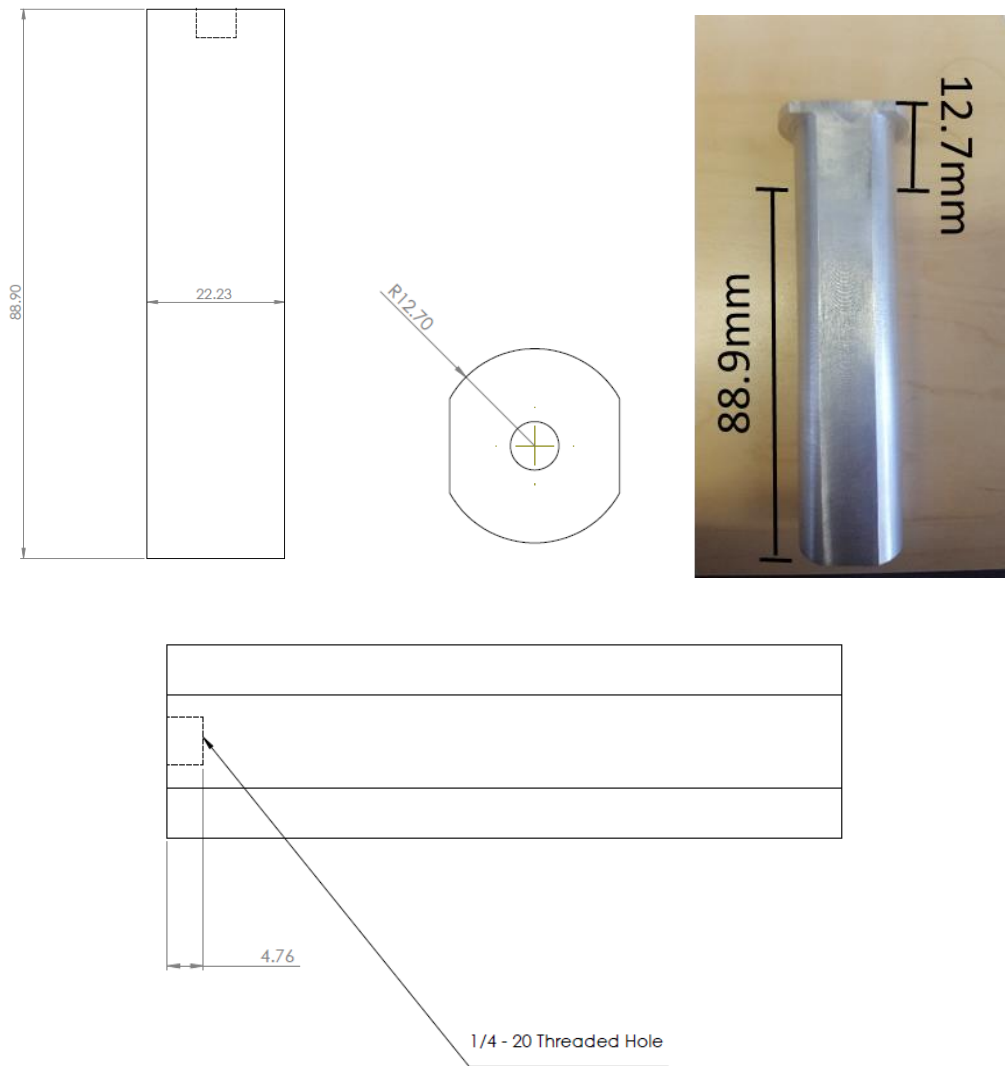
Solidworks drawing of 88.9 mm test specimen and an image of the specimen once cap is attached
